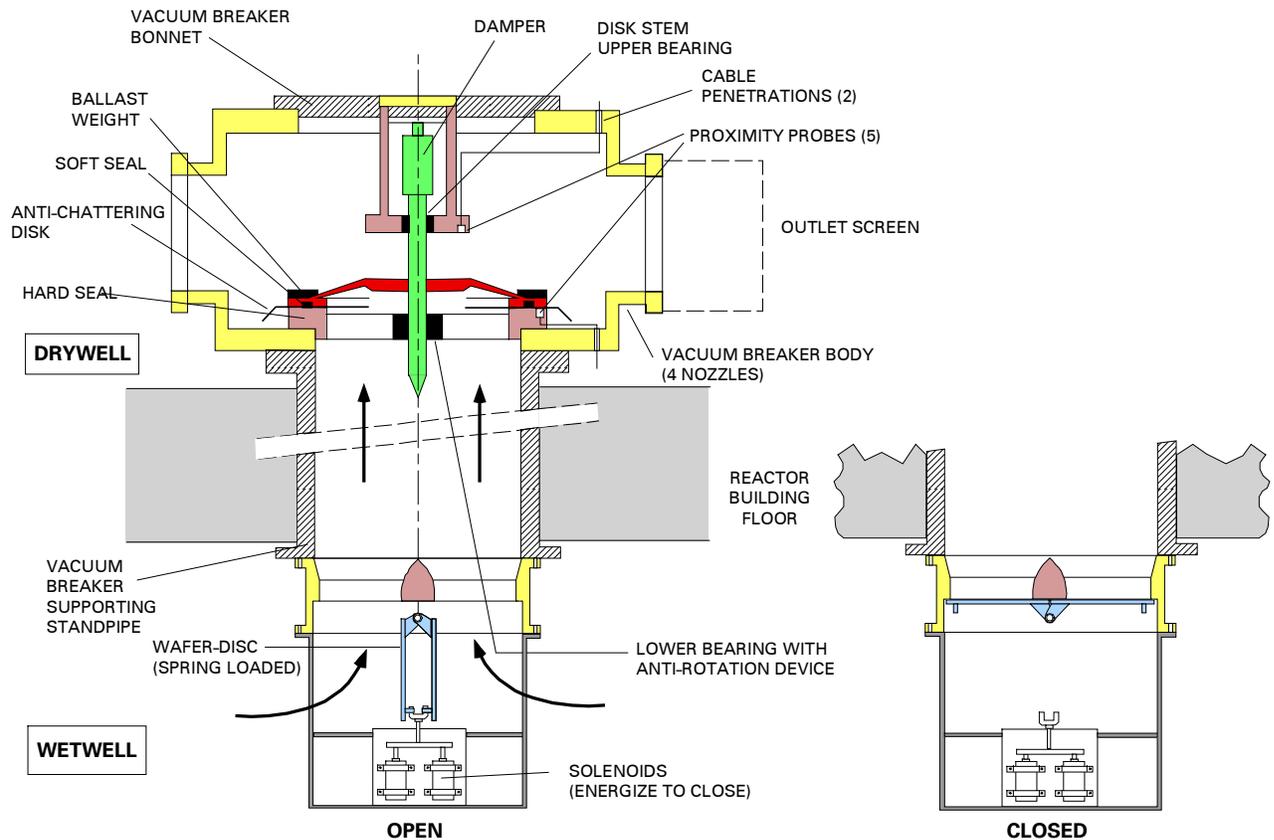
ESBWR Wetwell-to-Drywell Vacuum Breaker with Backup Closure Valve
